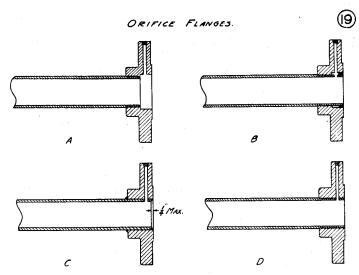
FORMS OF FLANGES USED IN THE TESTS AT SOUTH COLUMBUS.
